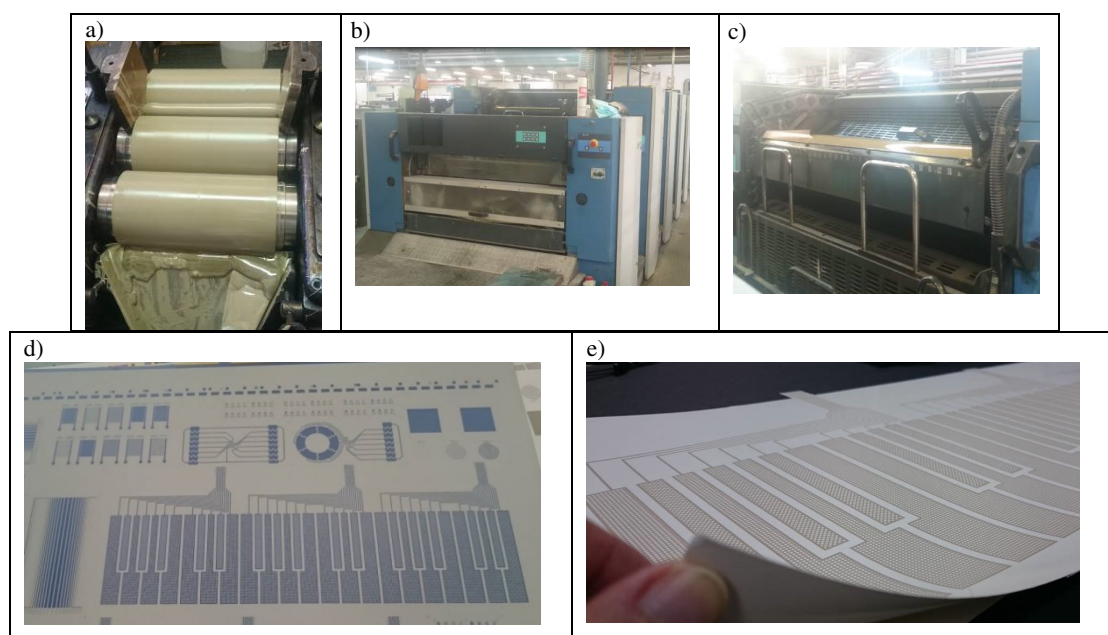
a) Three roll mill manufacture process of conductive ink; b) and c) offset lithography printing using a six bodies KBA machine; d) CTP with various printing designs; e) musical device printed on paper substrate
